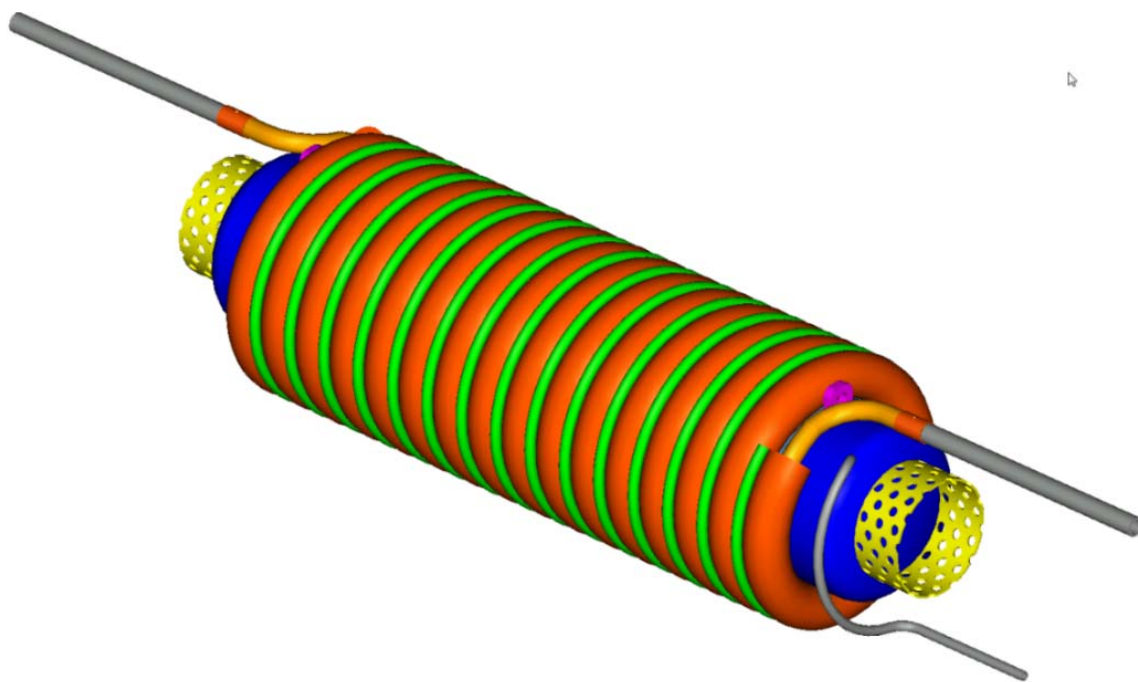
Collins-type heat exchanger, mandrel, fin-tube with nylon rope assembly (before being inserted into the shell)
